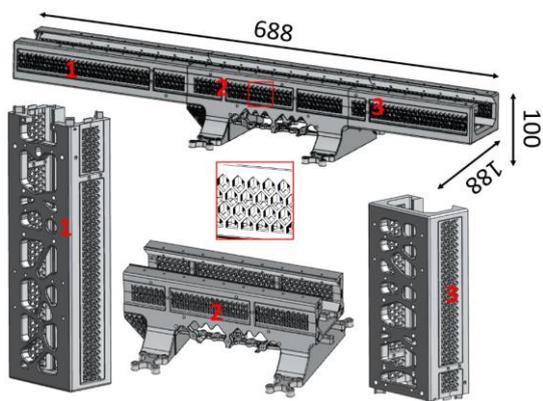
Guideway for precision machine designed for Additive Manufacturing by laser powder bed fusion (L-PBF). Target: Fitting the components in a commercial L-PBF machine and reducing the number of assembly operations and the part weight.
